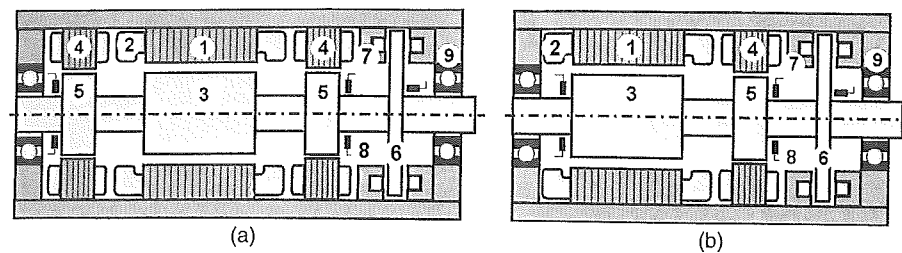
Schematic drawings of five axis magnetic levitated machines with (a) two radial and one axial magnetic bearing or with (b) one bearingless unit, one radial and one axial magnetic bearing; 1 – motor stator; 2 – winding overhang; 3 – rotor of motor; 4 – radial magnetic bearing stator; 5 – radial magnetic bearing rotor; 6 – axial magnetic bearing disc; 7 – axial magnetic bearing stator; 8 – position sensors; 9 – auxiliary ball bearings
